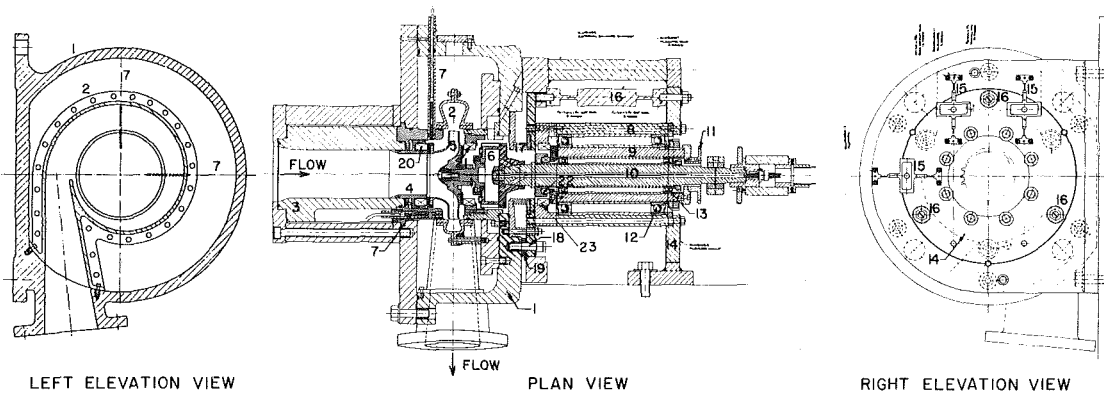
Machine drawing of the impeller, volute, internal balance, eccentric drive, pump housing and external balance assembly of the Rotor Force Test Facility. Pump housing (1); volute (2); inlet connection (3); inlet bell (4); impeller (5); internal balance (6); proximity probes (7); eccentric drive mechanism: outer bearing carrier (8), inner bearing carrier (9), main shaft (10), orbiting motion sprocket (11) and bearings (12, 13); external balance: flexure face (14), flexure elements (15, not shown in the plan view) and axial flexures (16); bellows (17); bolts linking floating system and ground (18); spacers (19); impeller front face seals (20) and back face seals (21); eccentric drive inner face seals (22) and outer face seals (23). Note: The system is shown in its caged position. Removal of bolts (18) and spacers (19) will make unit float (see also text).
